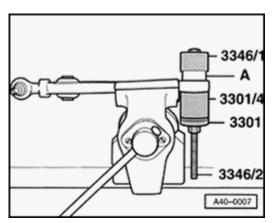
Inner Bushing, Pulling In Courtesy of VOLKSWAGEN UNITED STATES, INC.
